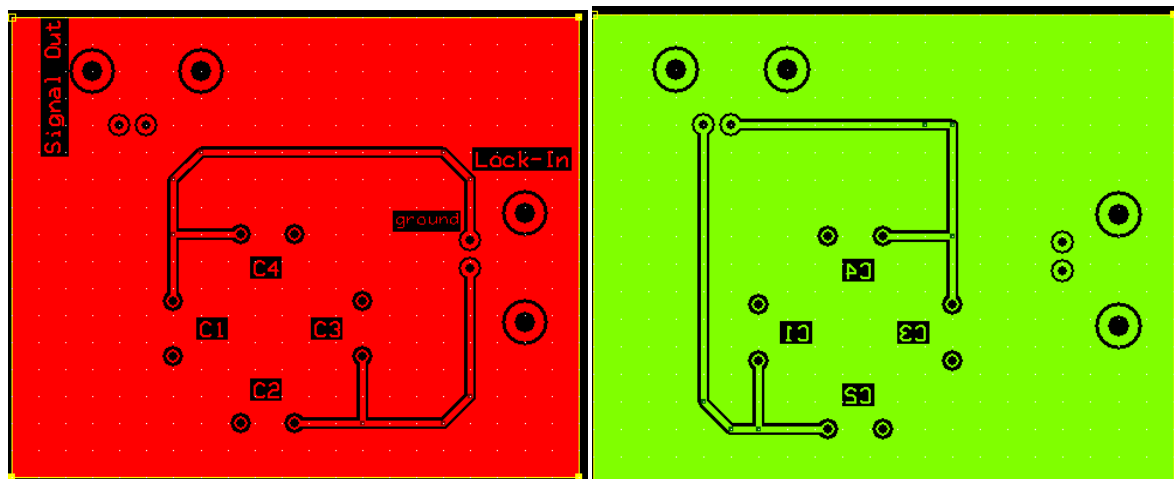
Figure 6: Top (red) of the PCB board and bottom (yellow-green) of the PCB board.
